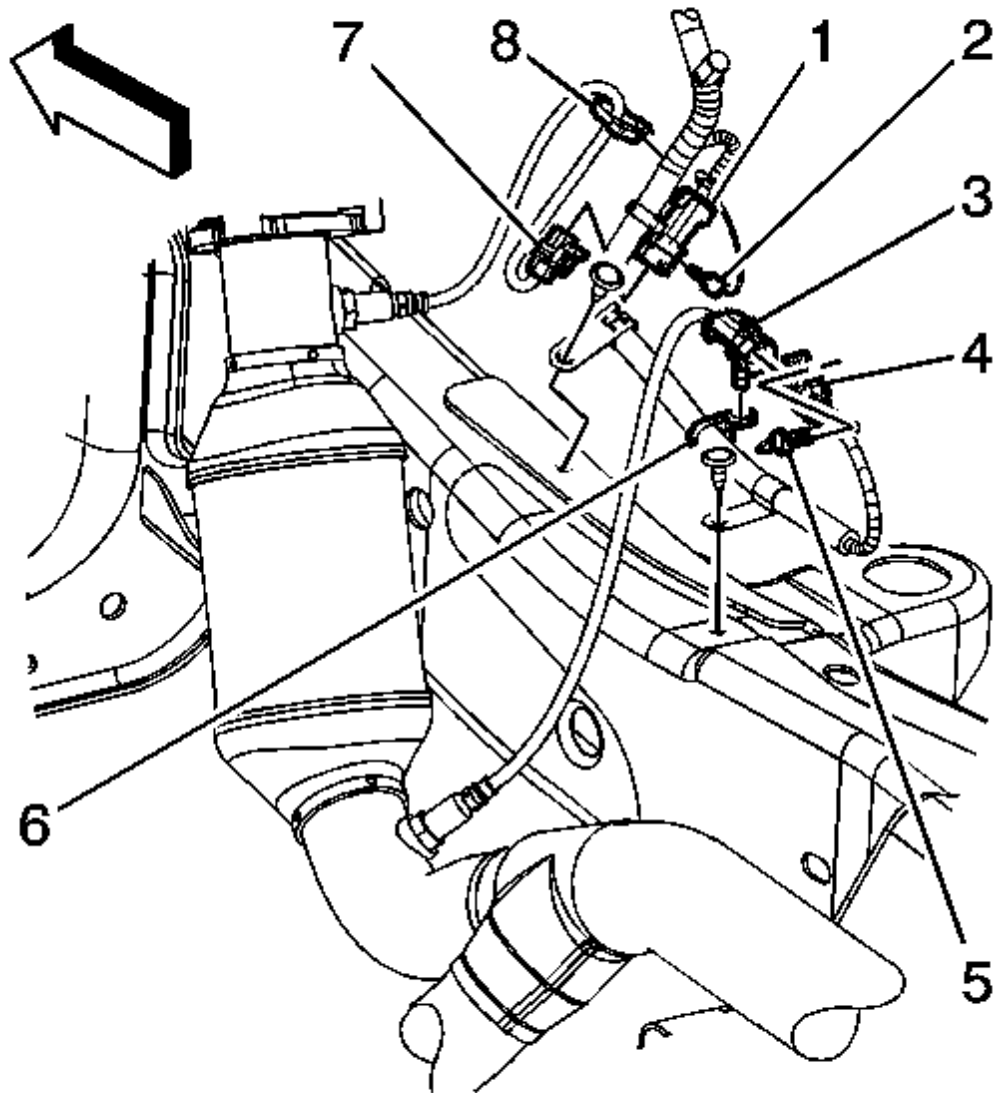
View Of Engine Wiring Harness Electrical Connectors, (CPA) Retainers & Engine Harness Clips
